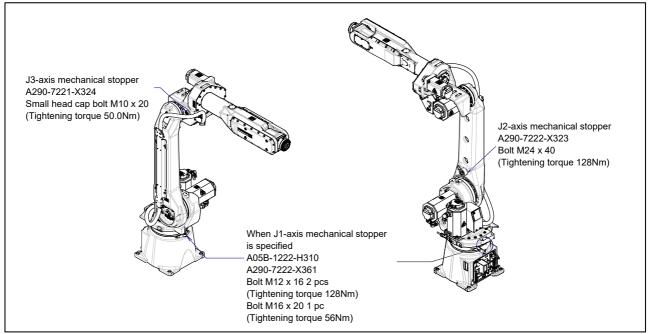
(a) Check of mechanical stopper and adjustable mechanical stopper
